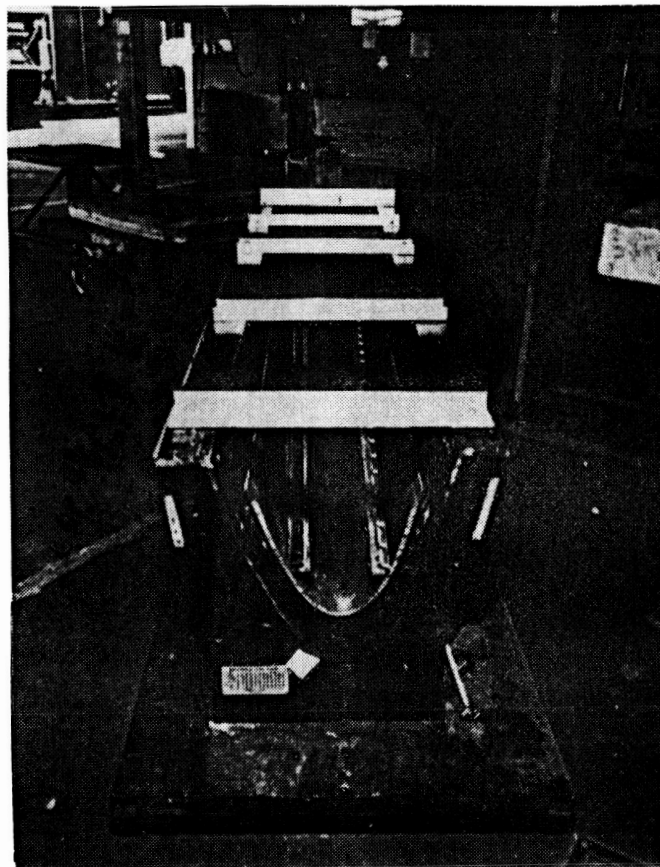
Assembly with Upper and Lower Attach Angles Installed
